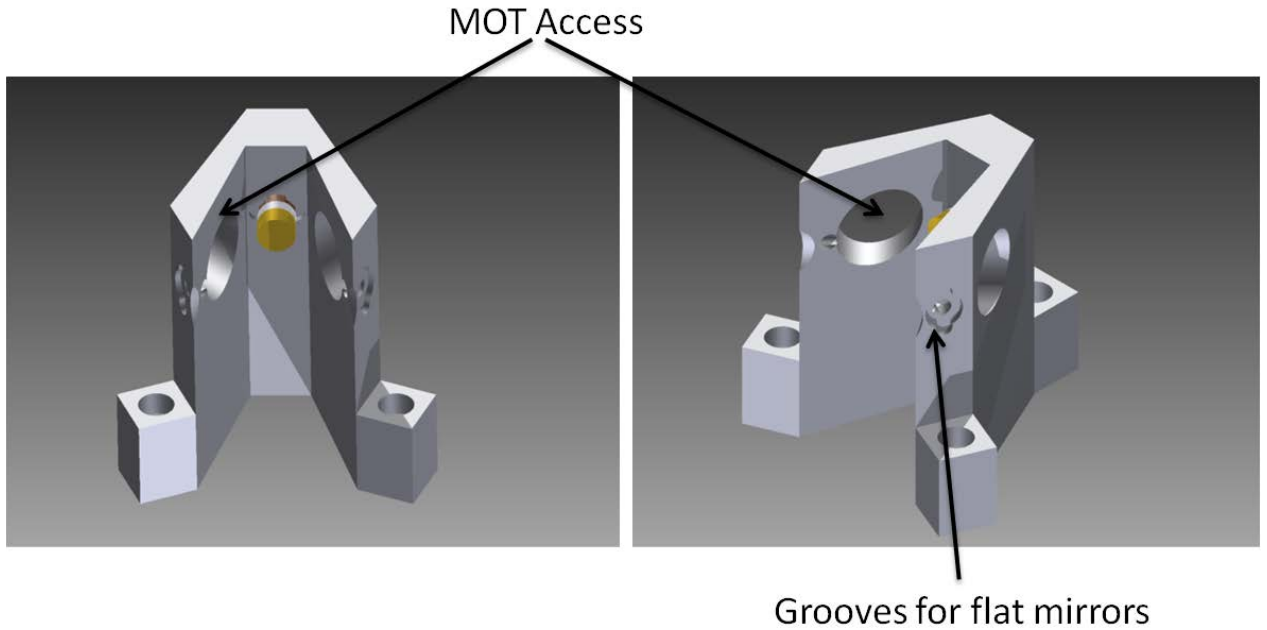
3D CAD model of the ring cavity showing MOT beam access.
